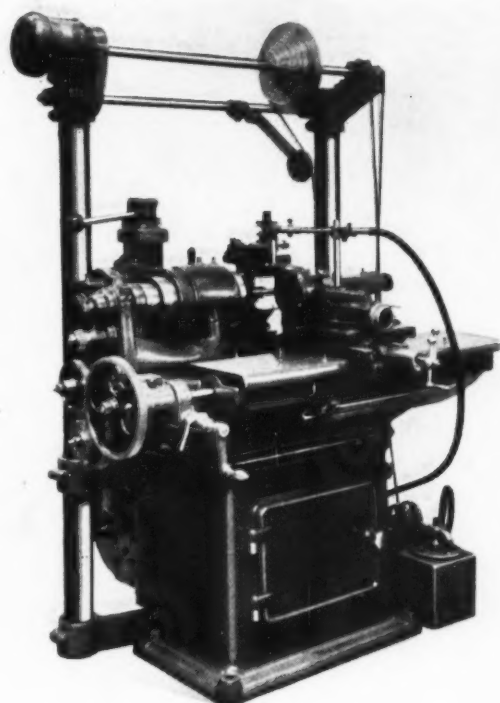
Front View of the Improved Cincinnati No. 2 Cutter and Tool Sharpening Machine
